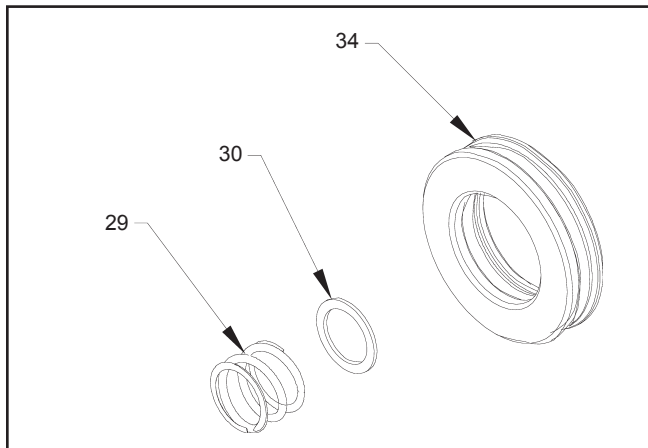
PG / PE Pump Block Spring and Thrust Bearing
